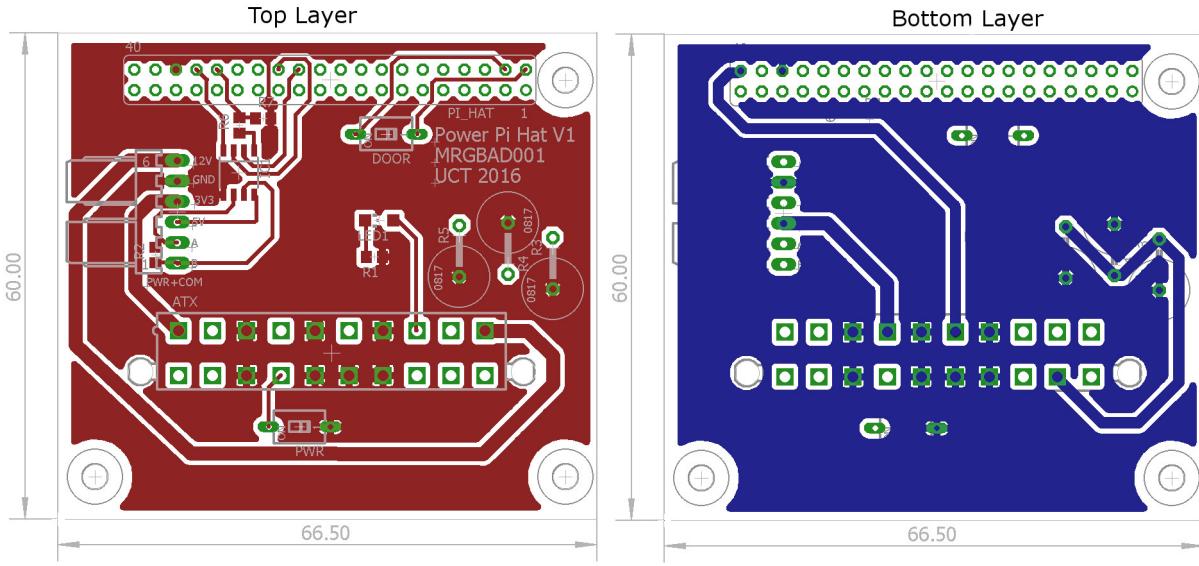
PCB layout of the Raspberry Pi HAT, top and bottom layer.
